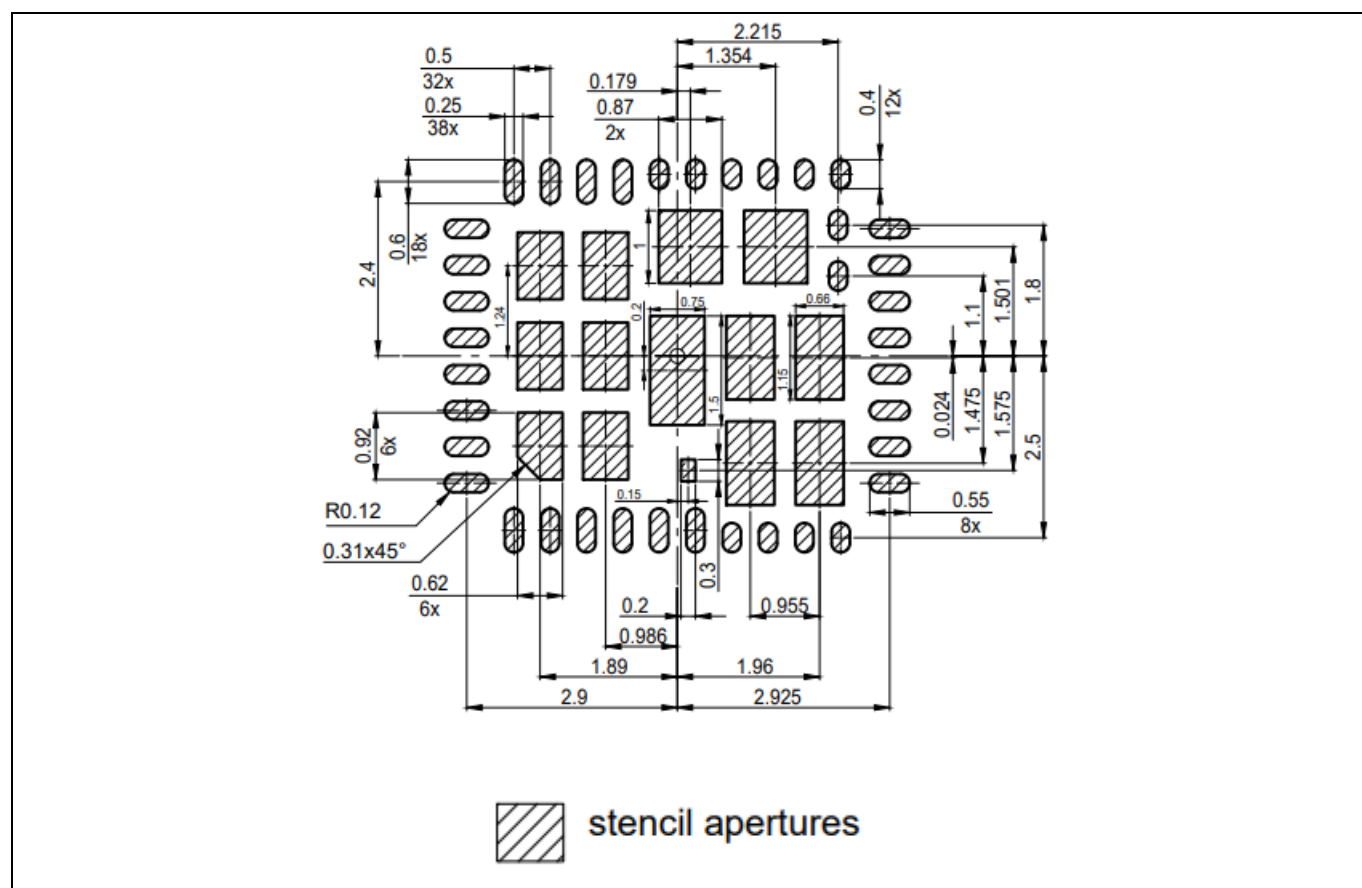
Stencil pad size and spacing (all dimensions in mm)
